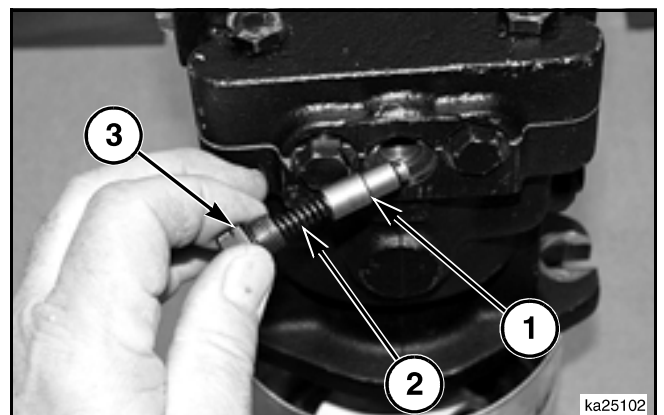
Lightly lubricate the new O-ring with clean petroleum jelly prior to assembly. Install the new O-ring onto the hex plug (1).
